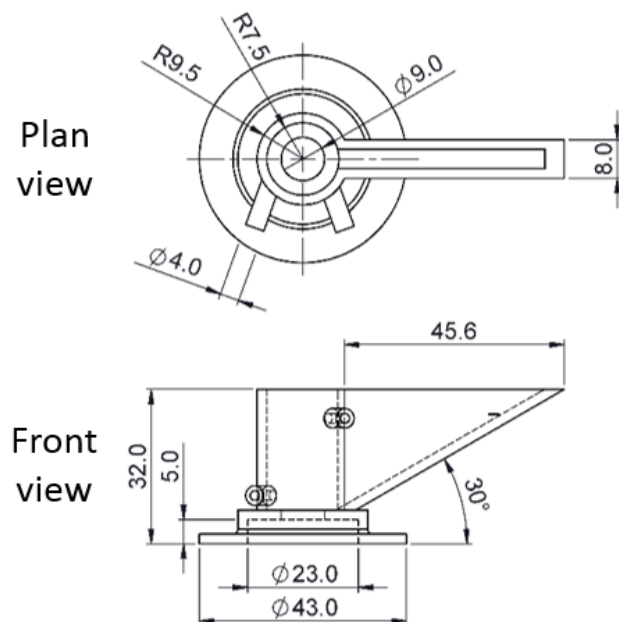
Dimensions of the 3D printed VeroClear donor chamber. Dimensions of the receiver chamber are shown in Chapter 2.
